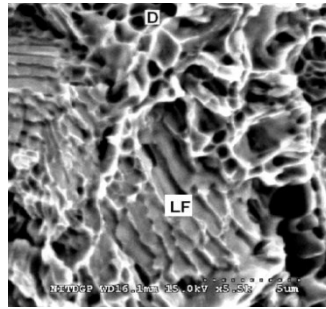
Fractured surfaces of the tensile tested specimens: (b) 1-cycle
